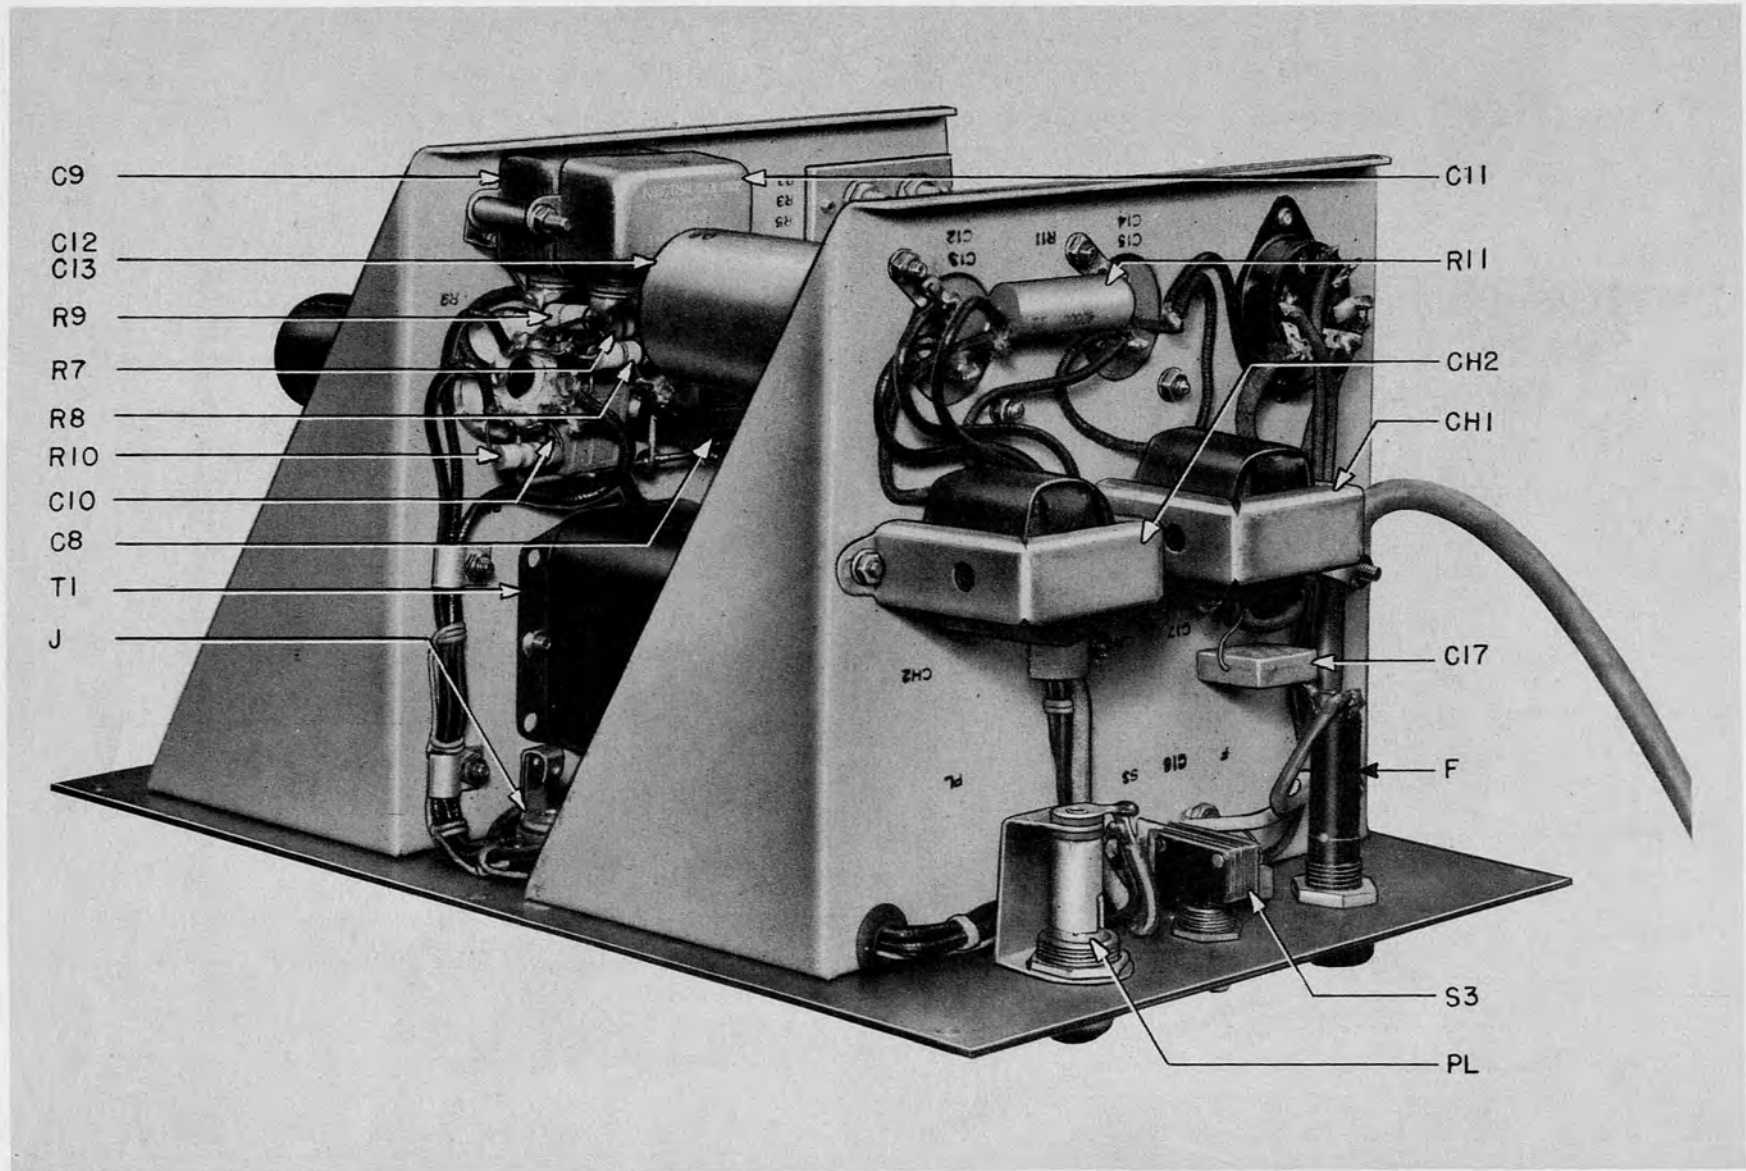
Frequency Meter BC-438, Bottom Oblique Right-side View, without Shields
